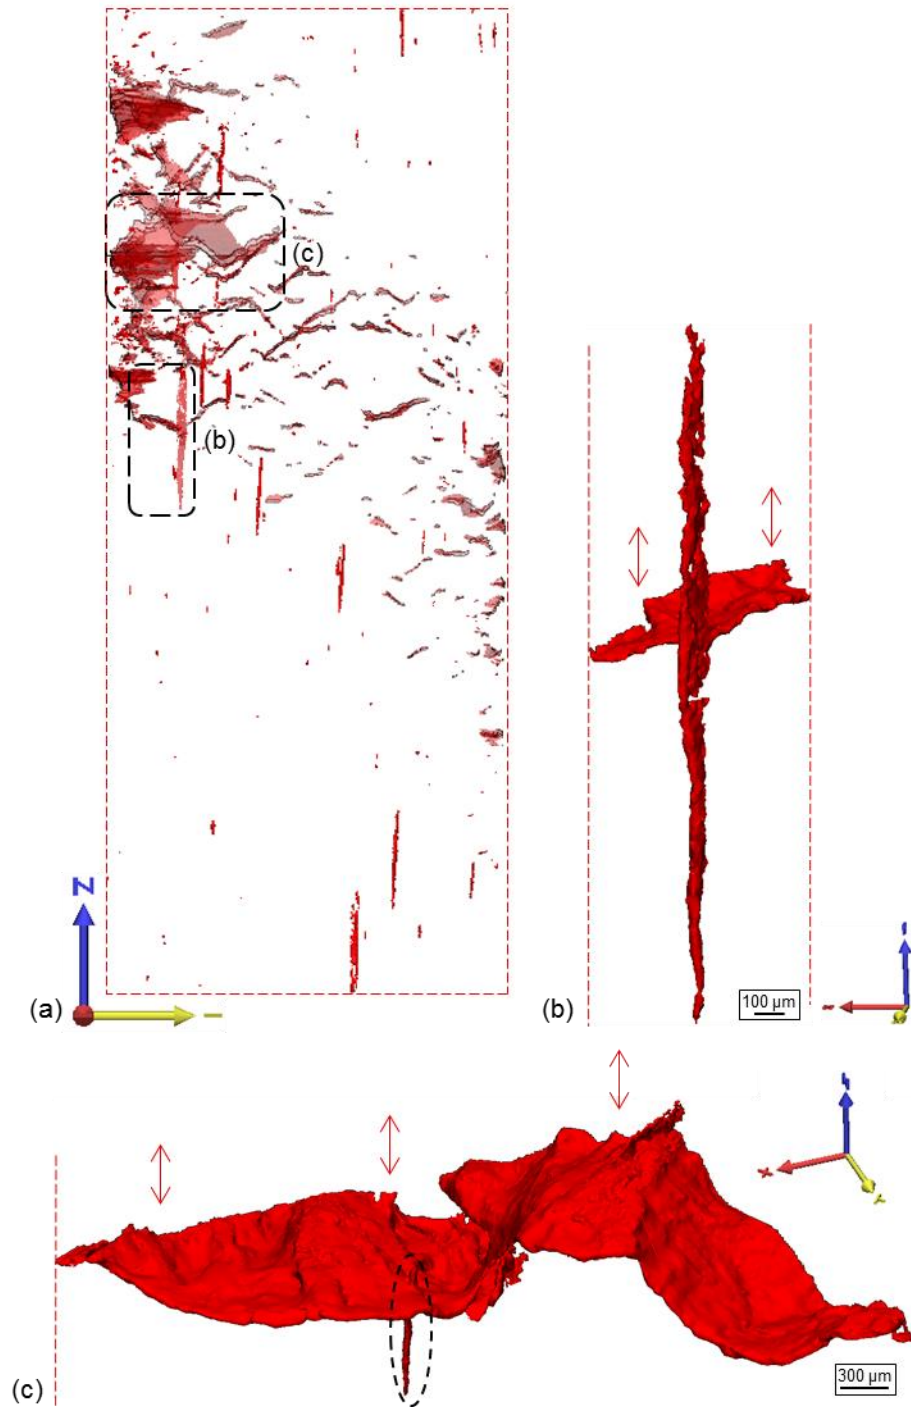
(a) Side view of manufacturing defects in the post-test forged MarBN sample, (b) secondary crack and (c) primary crack at a stringer type defect. Dashed red lines indicate the sample surface and red arrows denote the direction of loading.
